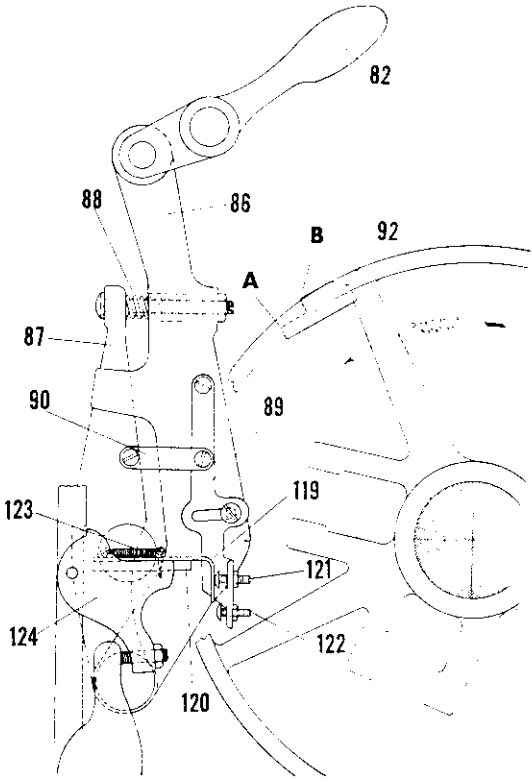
View of the mold slide safety stop attachment from right side of the machine. The operating lever and link are attached to the resilient mold cam lever, and the mold safety slide is attached to the upper automatic stopping lever. The stop 92 is attached to the delivery and transfer cam.
